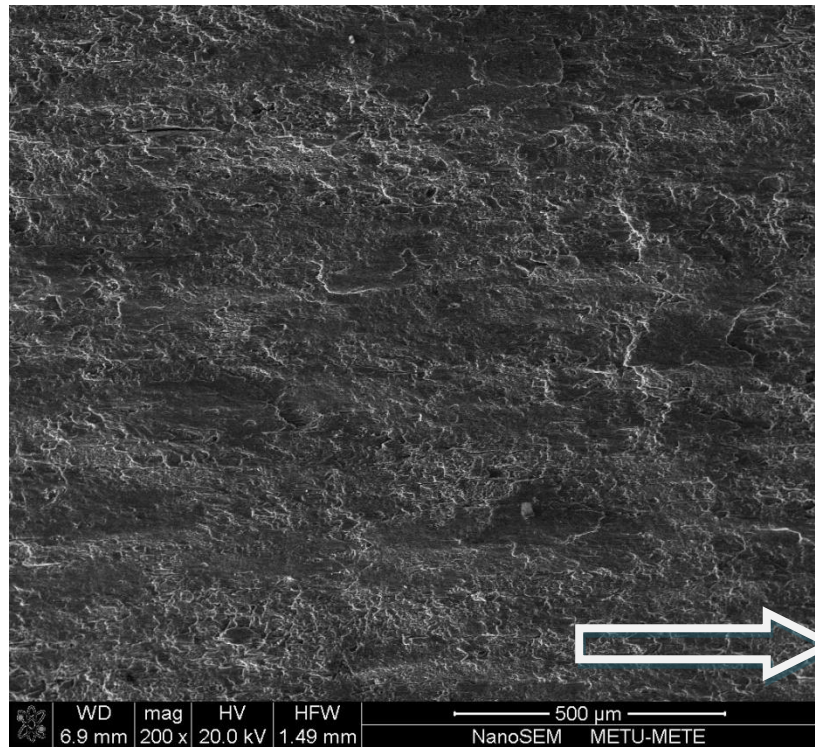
25 General view of the fracture surface (LT direction - K_{IIC} specimen).
